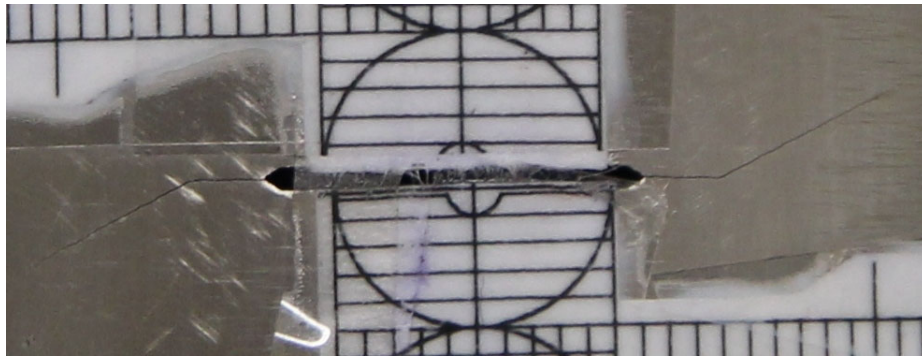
Fatigue crack in specimen I+II+1.25OL-A
